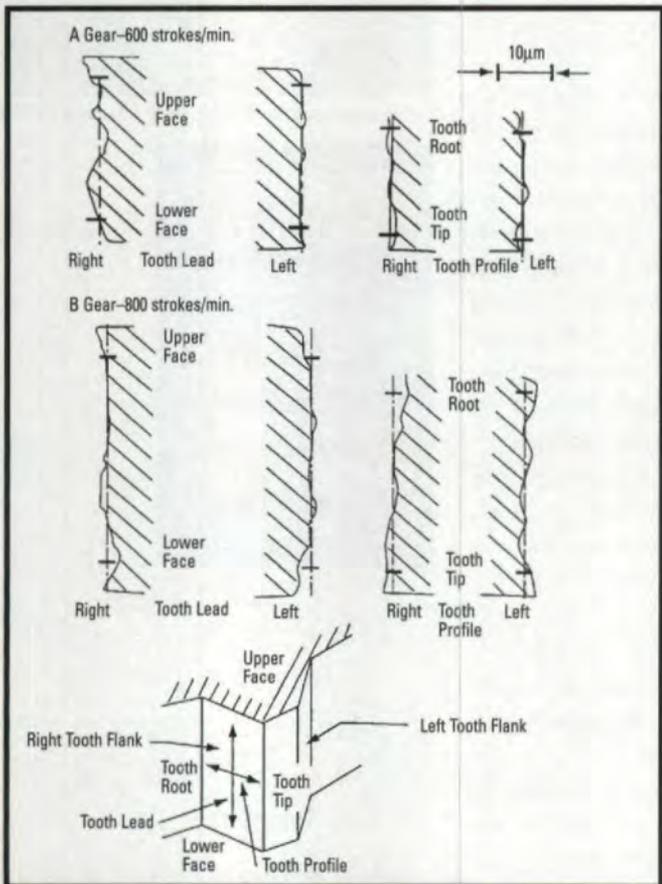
Accuracy achieved: AGMA 10 data points obtained from measuring gears cut on ST25CNC according to cutting conditions shown in Table 2.
